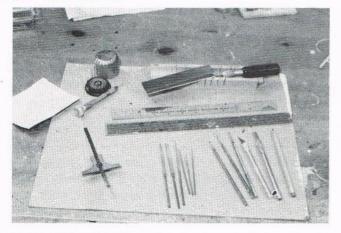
All of these joints can be cut with hand tools. Even though power tools will often speed up the work, a hand-cut joint can produce a comparable, excellent
